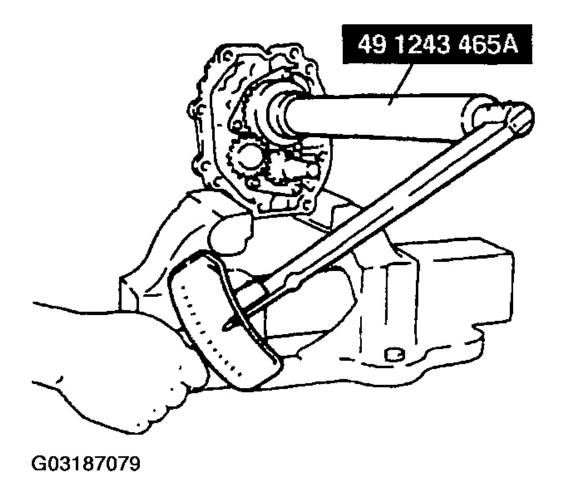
Tightening Locknut Courtesy of MAZDA MOTORS CORP.
